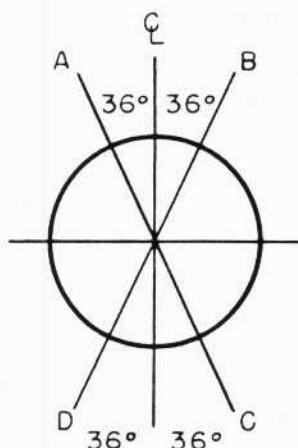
Dial Indicator Alignment Tolerances
